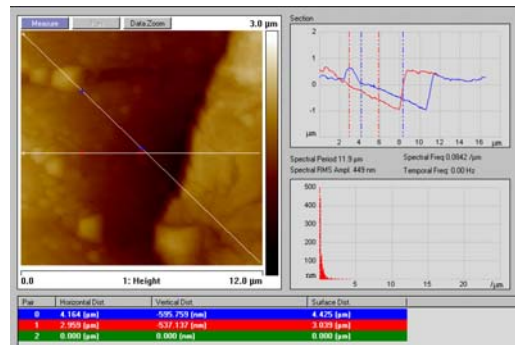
"Section" for surface defect of K21 uncoated carbide inserts
